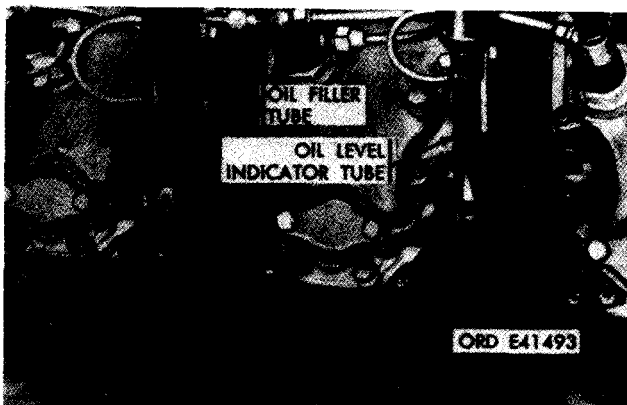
Removing or installing oil filler and oil level indicator tube plates - engines with one piece oil filler tube.
